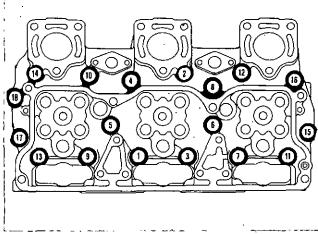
Cylinder head tightening sequence – V12, 5-1/2" bore
